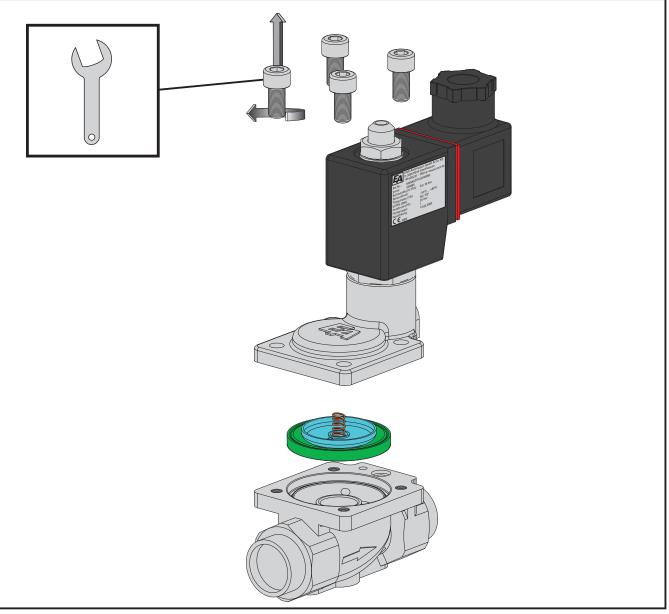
Mounting/ disassembly - welded connection, disassembly of the valve`s top
